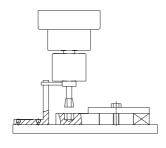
Use of the auxiliary lever with a drilling or milling machine Abbildung 8: Einsatz des Zusatzhebels an einer Bohrmaschine oder Fräse
